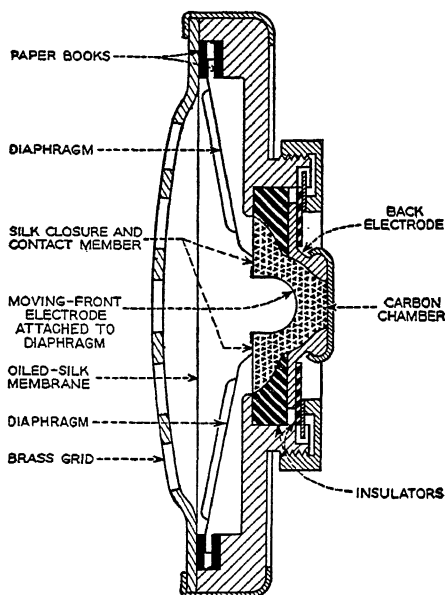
Cross-sectional View of Modern Non-positional Transmitter Unit (Courtesy Bell System)
